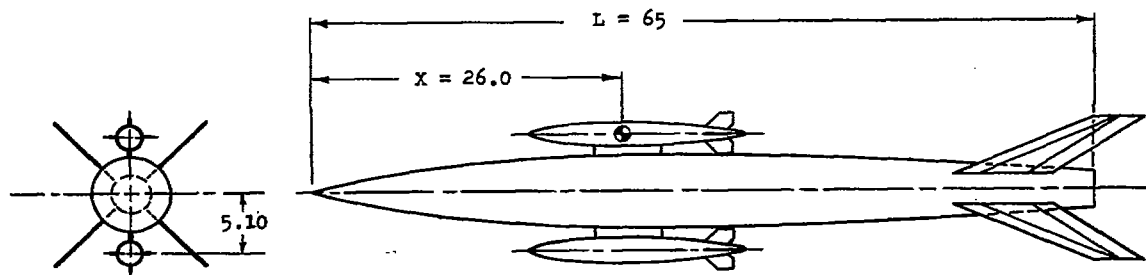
Detail and dimensions of stores. All dimensions are in inches.
